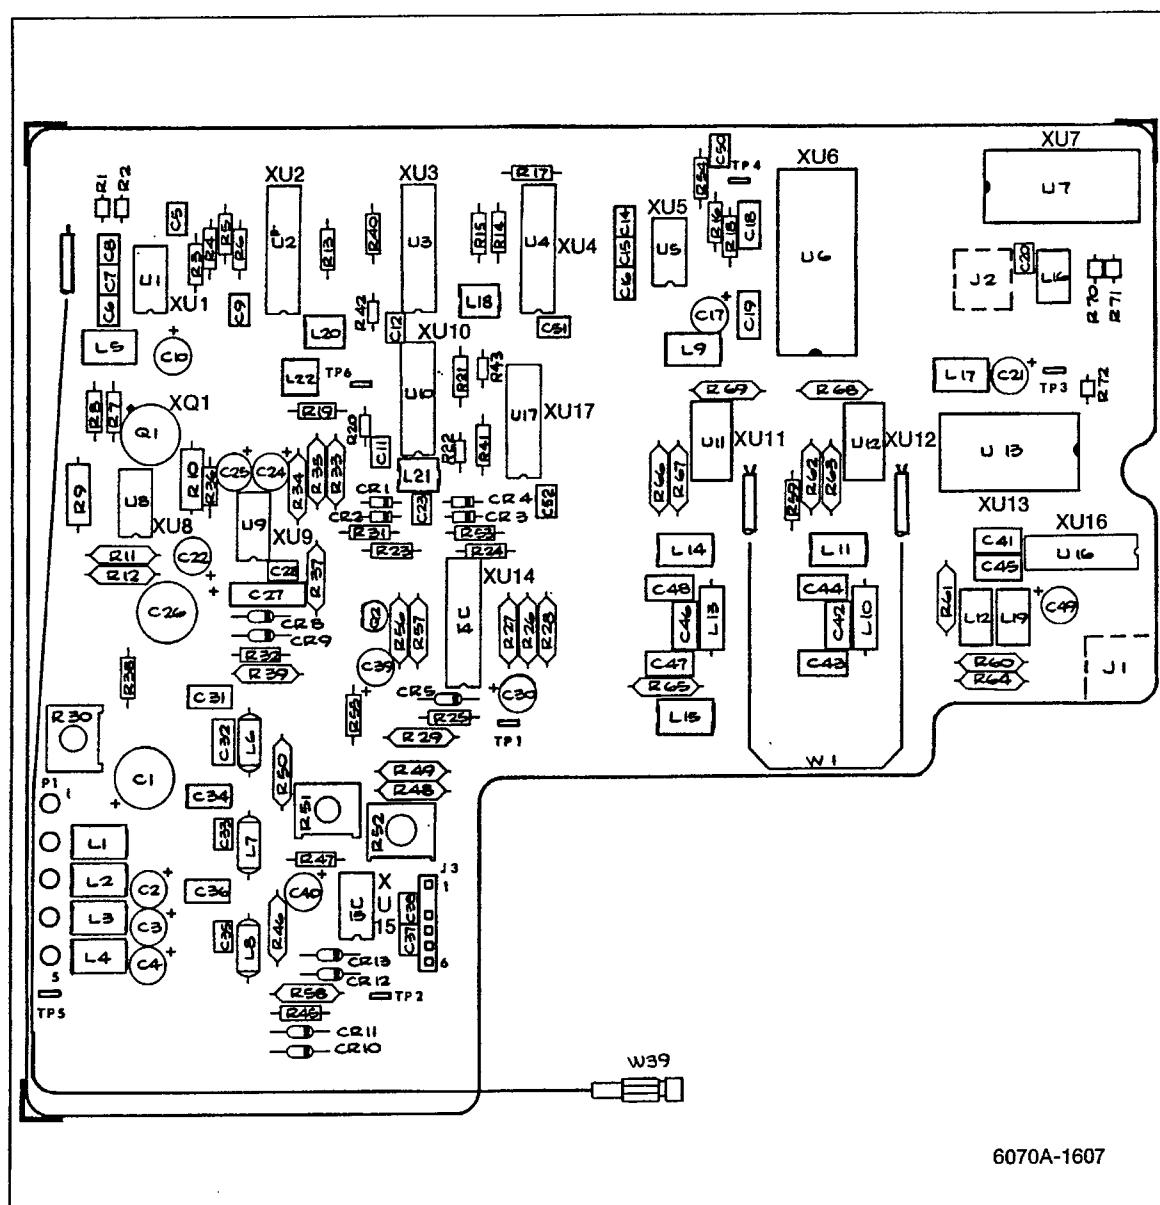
A3A6 Single Sideband Mixer PCB Assembly
